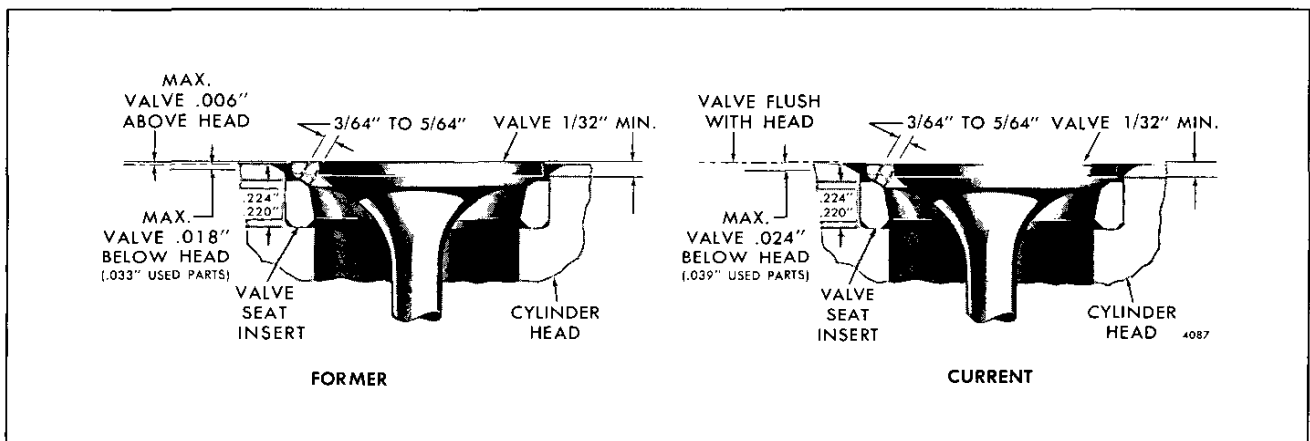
Relationship Between Exhaust Valve, Insert and Cylinder Head (Four-Valve Head)
